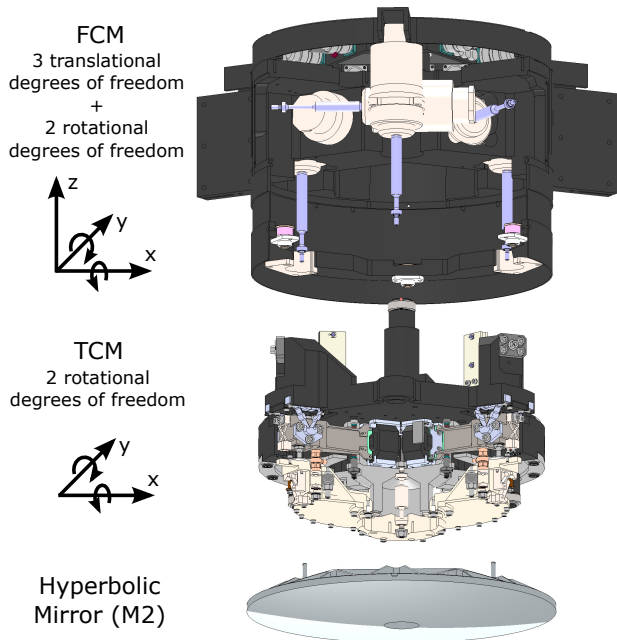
Exploded view of the three parts of SOFIA's SMA.
